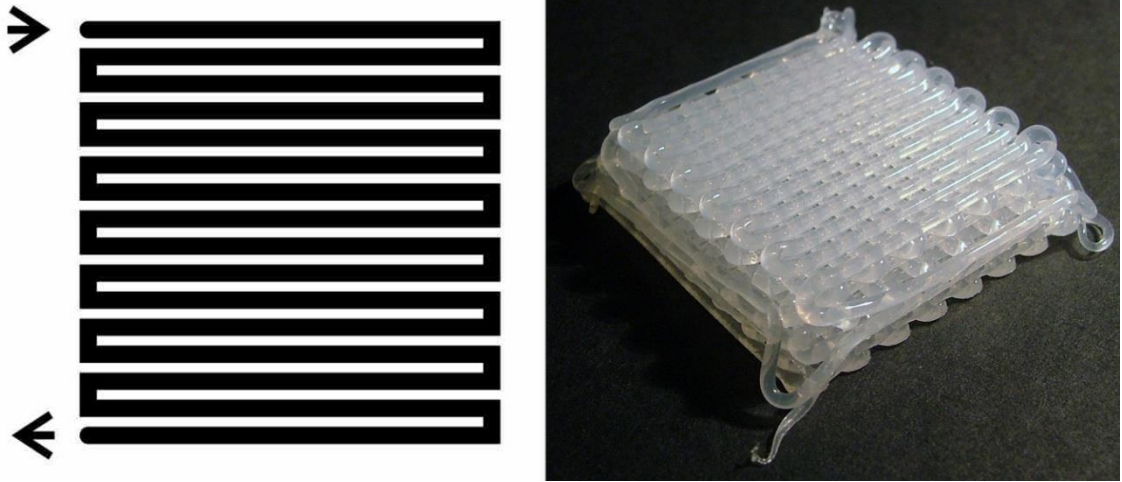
, Left: machine tool-path. Right: First build on Mk2, failed due to unexpected machine behaviour when creating consecutive layers. figure by author
